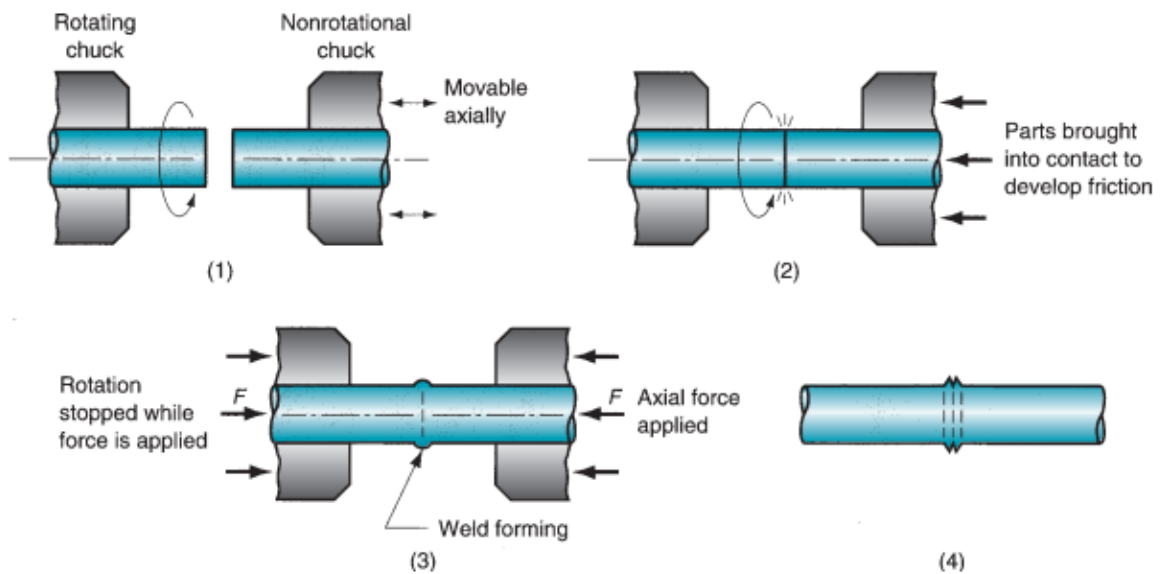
Visualization of Rotary Friction Welding example, where 1 – rotating part, 2 – parts brought into contact, 3 – axial force applied and rotation is stopped, 4 – weld result [41]
